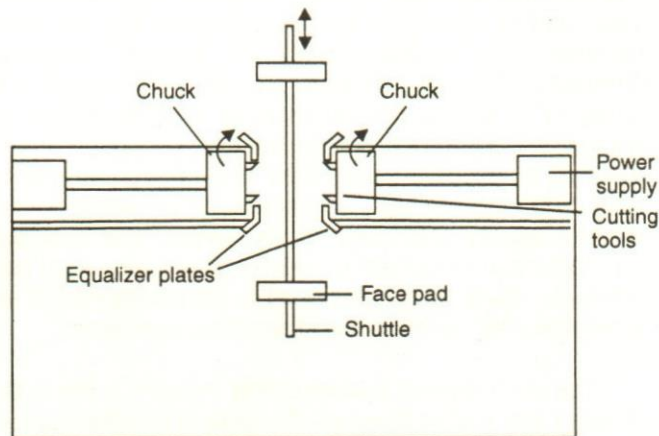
Face and Chamfer Machine—Equalizer Plates have been installed.
